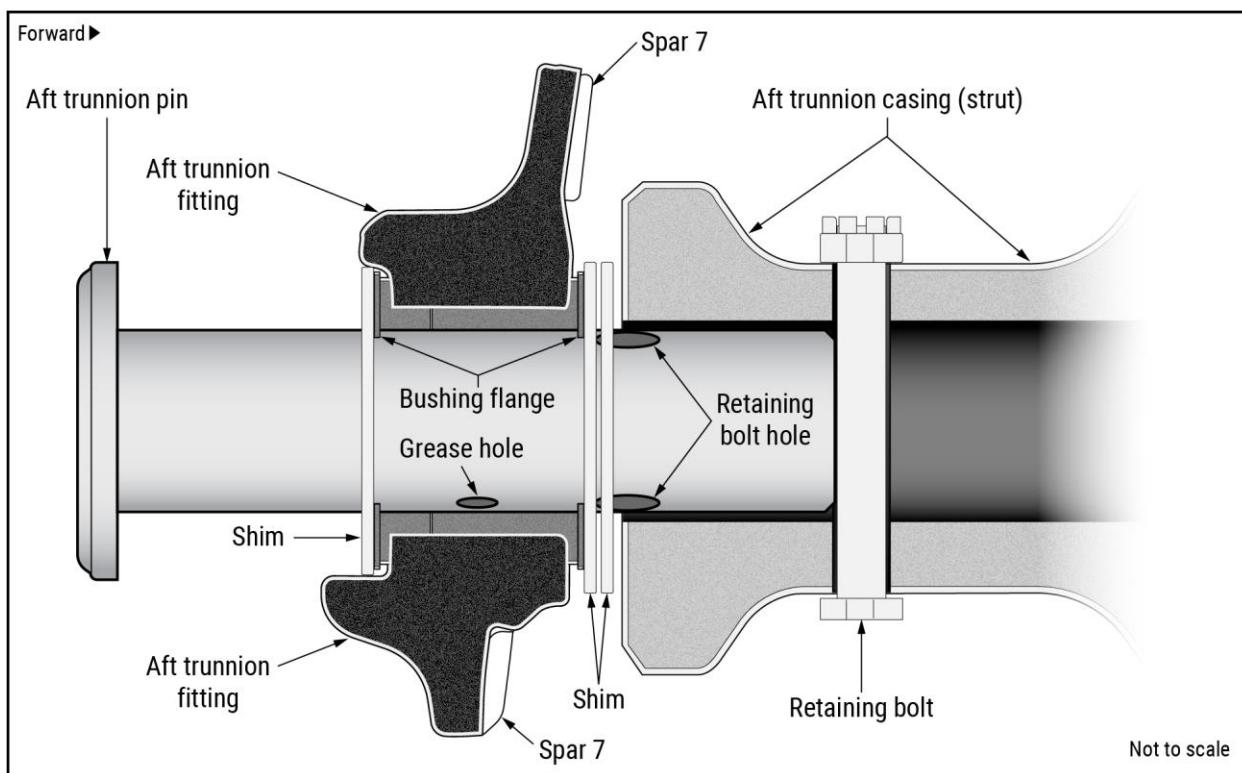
Cross-sectional illustration of insecurely attached landing gear.
